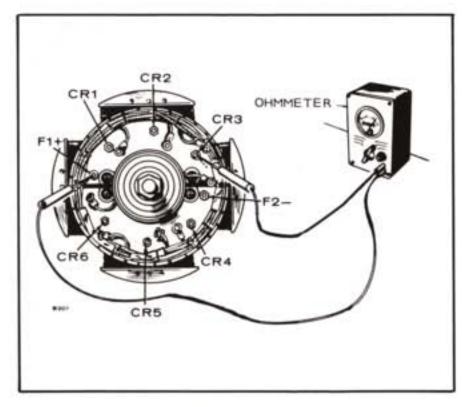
TESTING ROTATING RECTIFIERS
